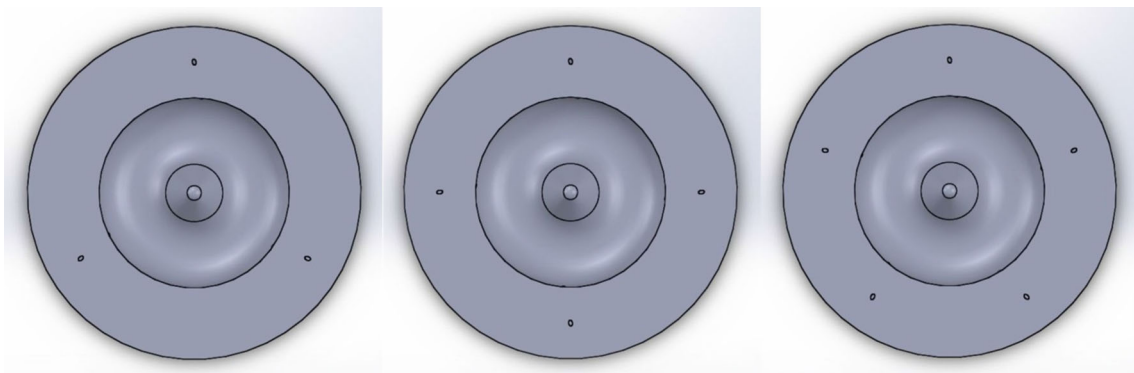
CAD view of 1-mm-diameter hole with the hole count of 3, 4, and 5
